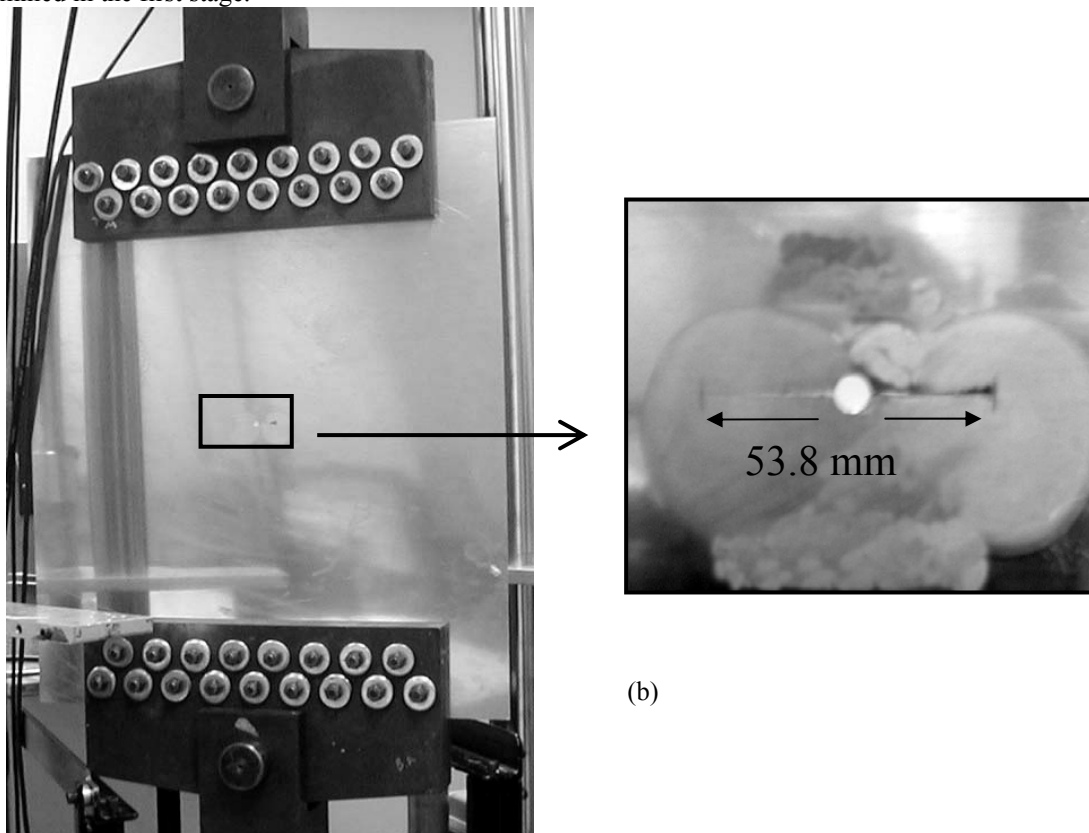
Experimental setup for fatigue testing without PWAS: (a) specimen VG-0 loaded in the MTS 810 testing machine; (b) notched hole serving as initial crack
